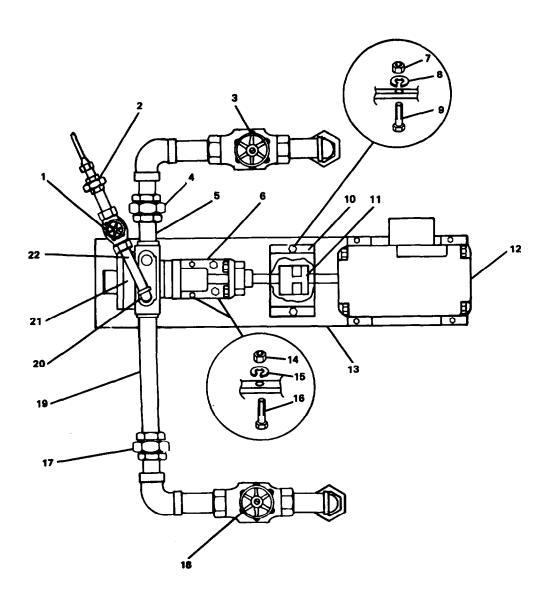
Rotary Pump (Dirty Lubricate Oil)
